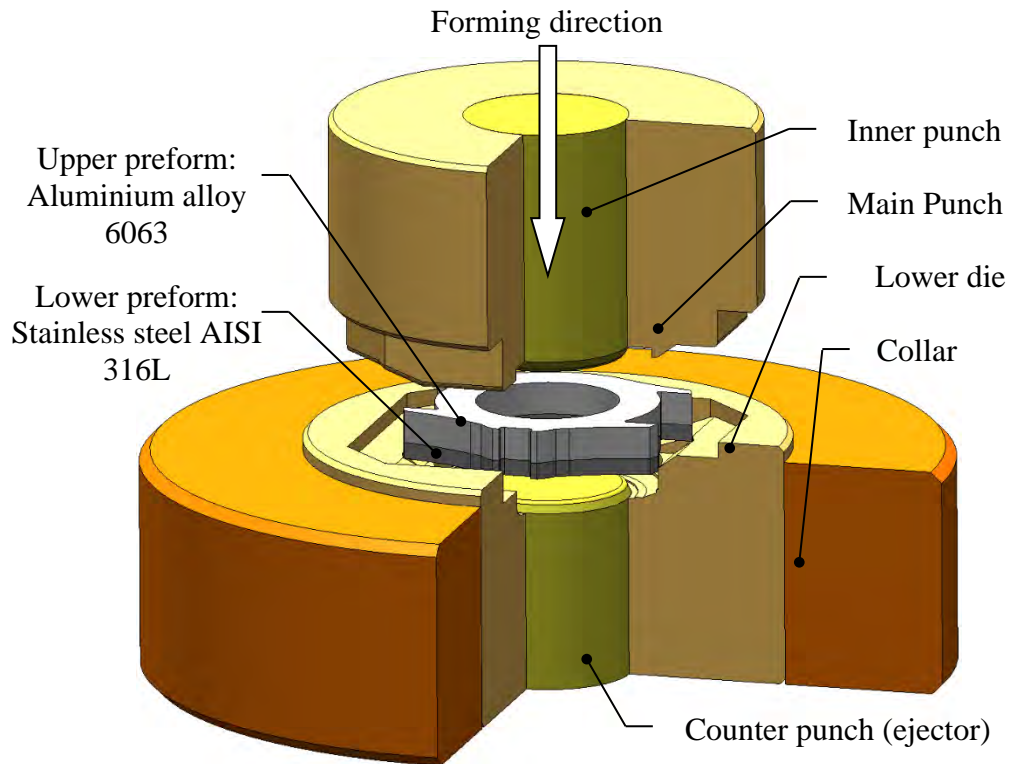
The preforms should be fitted properly inside the cavity of lower die.
